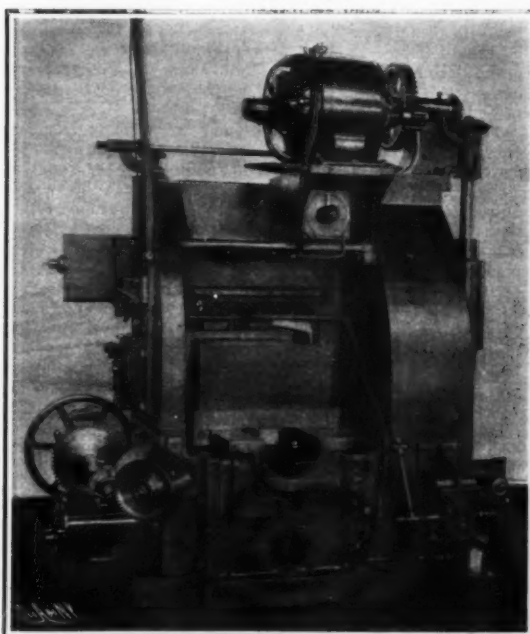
CIRCULAR MILLING MACHINE WITH 4 TO 7-HORSE-POWER MOTOR.
